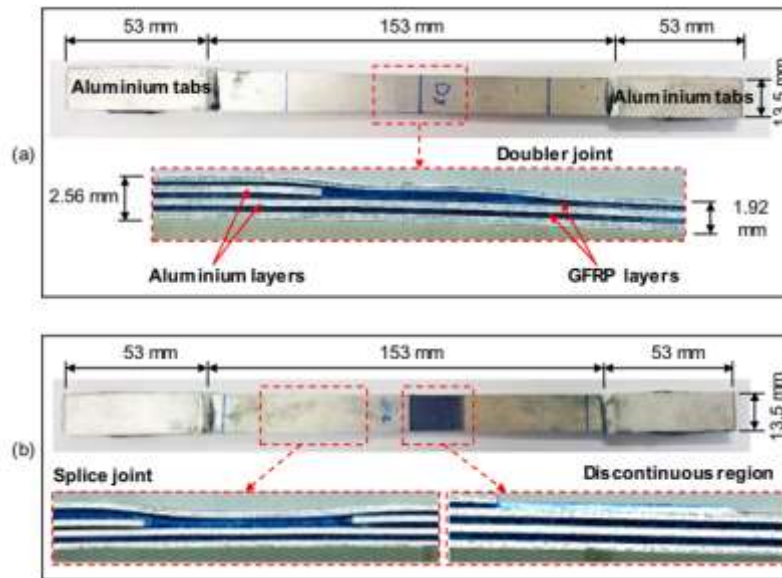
Specimen layout (a) doubler (b) splice (Al-Azzawi et al., 2019)
